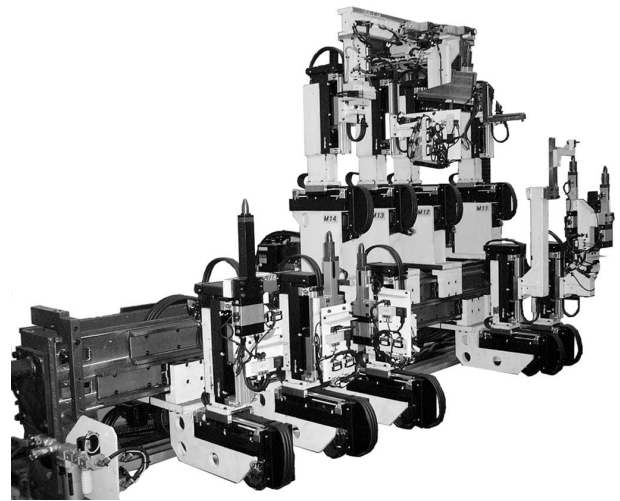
Appearance of Super-Multi-Axis Welding Jig
